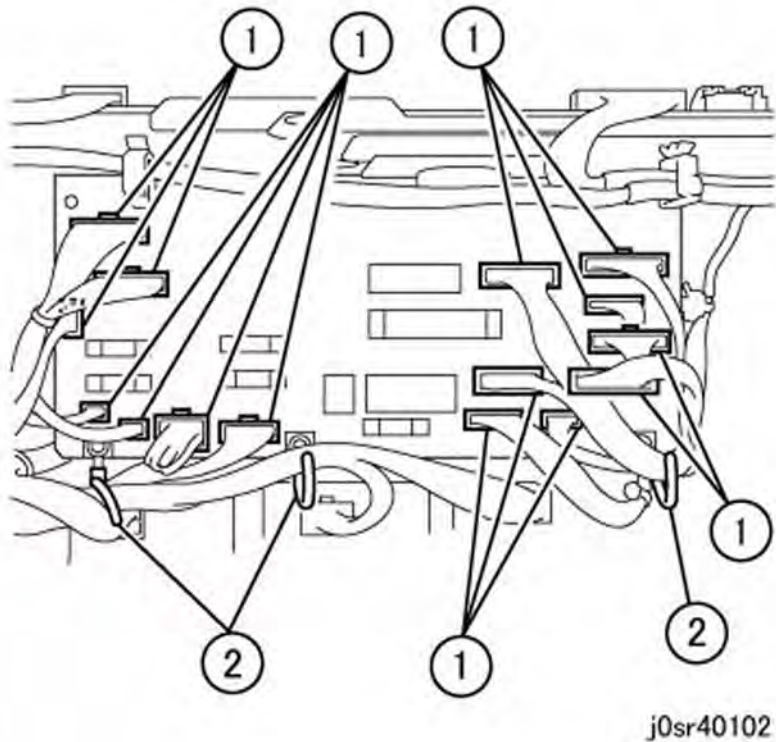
Removing the I/F (MDD) PWB harness connectors and clamps
